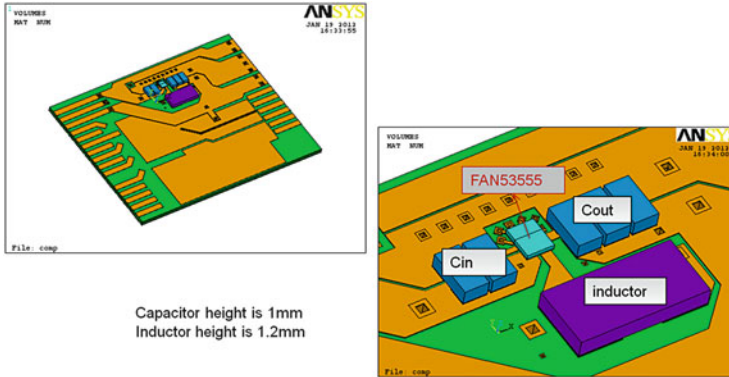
A 4×5 WLCSP mounted on a non-JEDEC PCB
